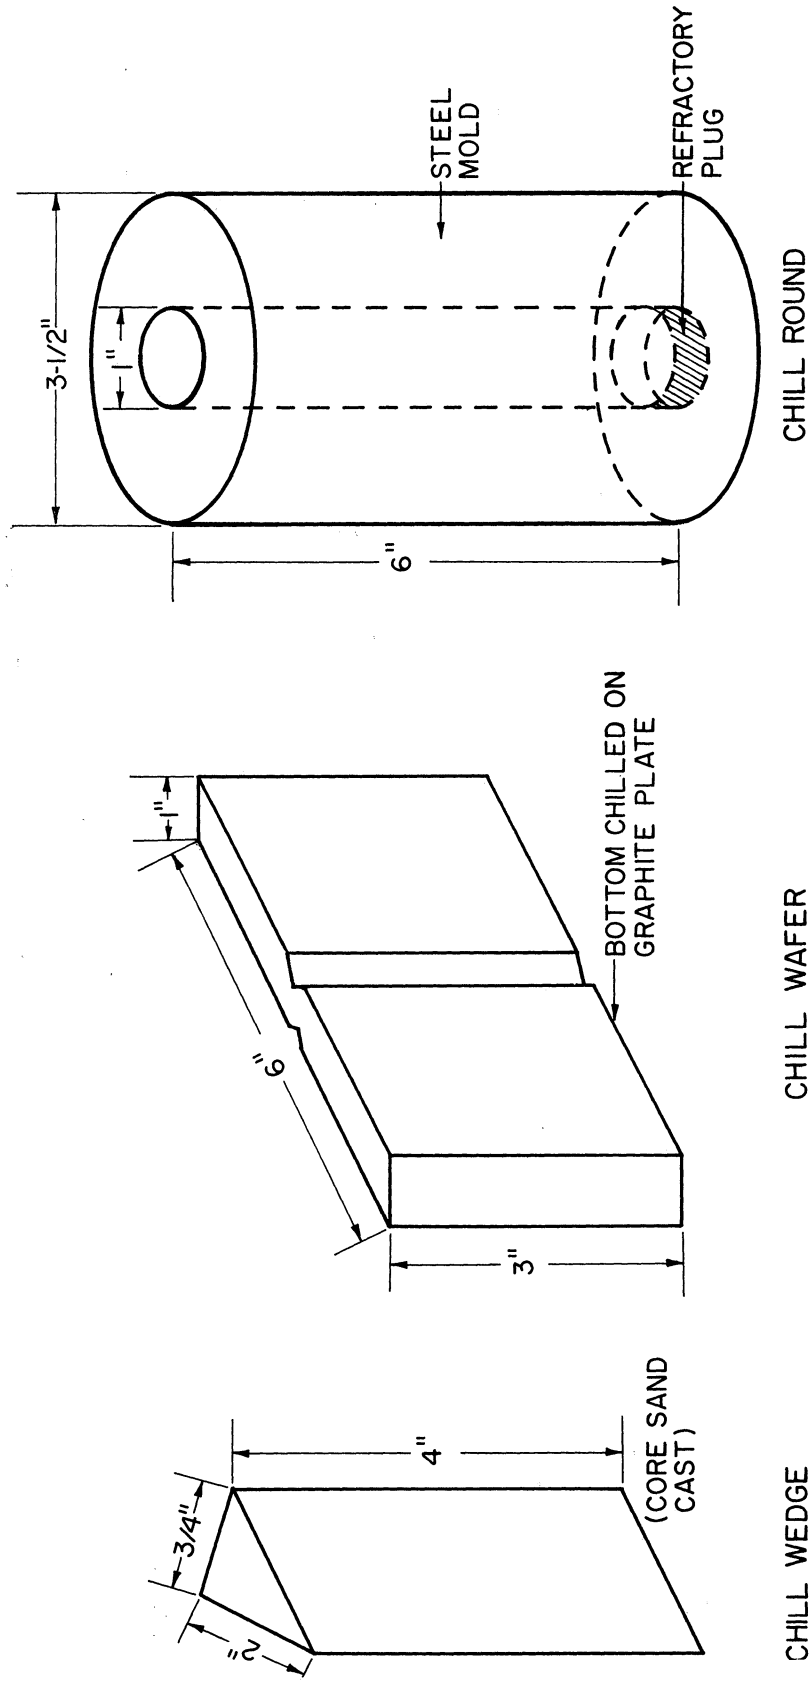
Chill wedge, wafer, and round dimensions and design.
